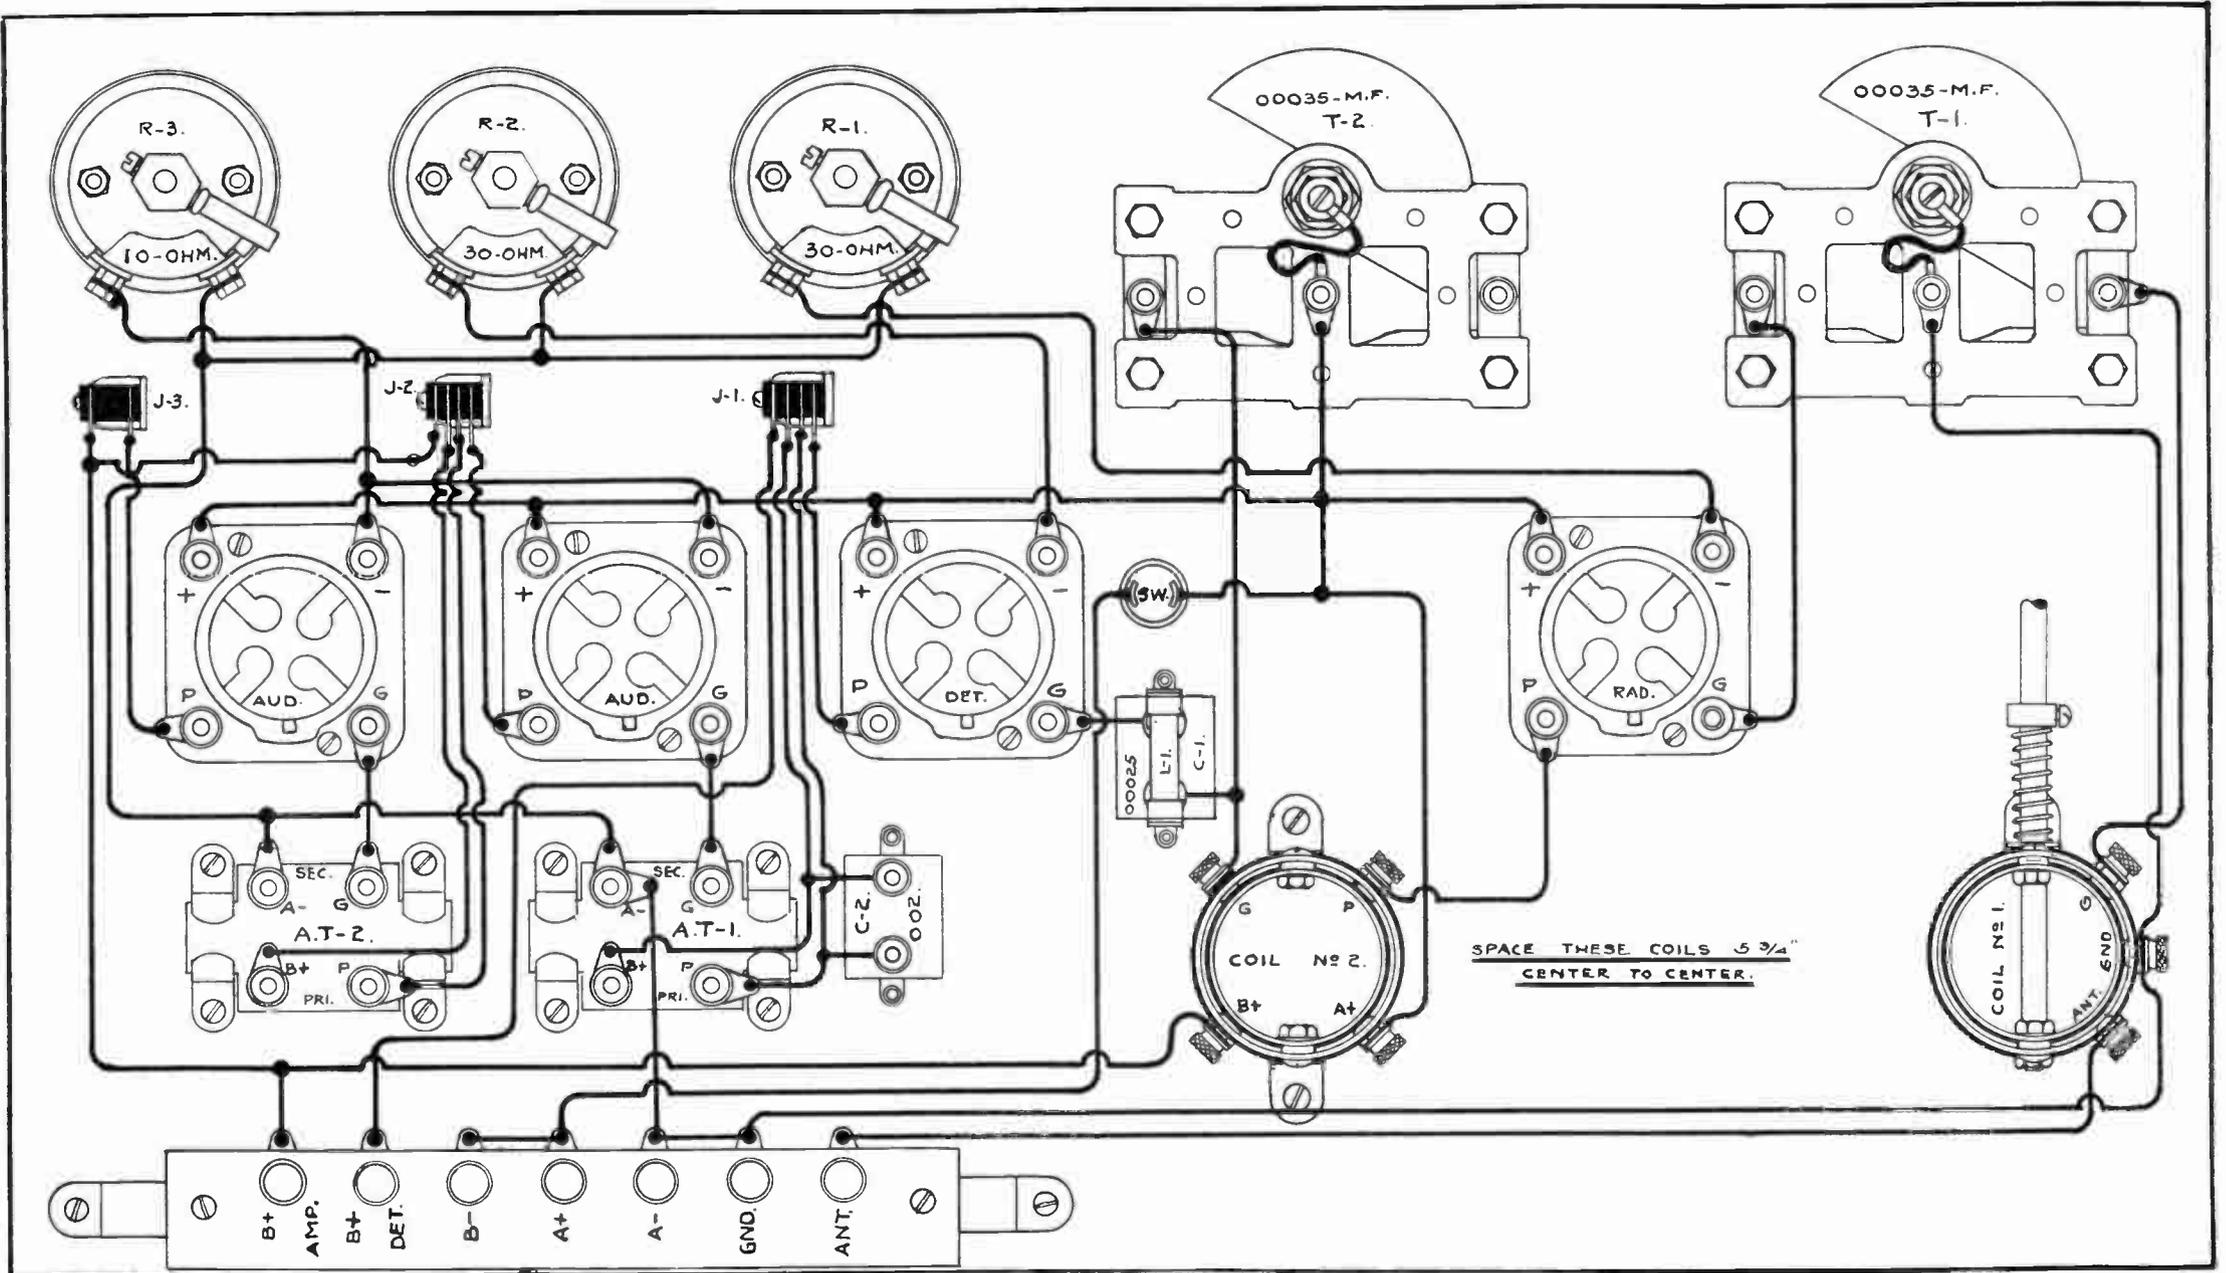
Drawing of Duston Special Transformer Coupled
